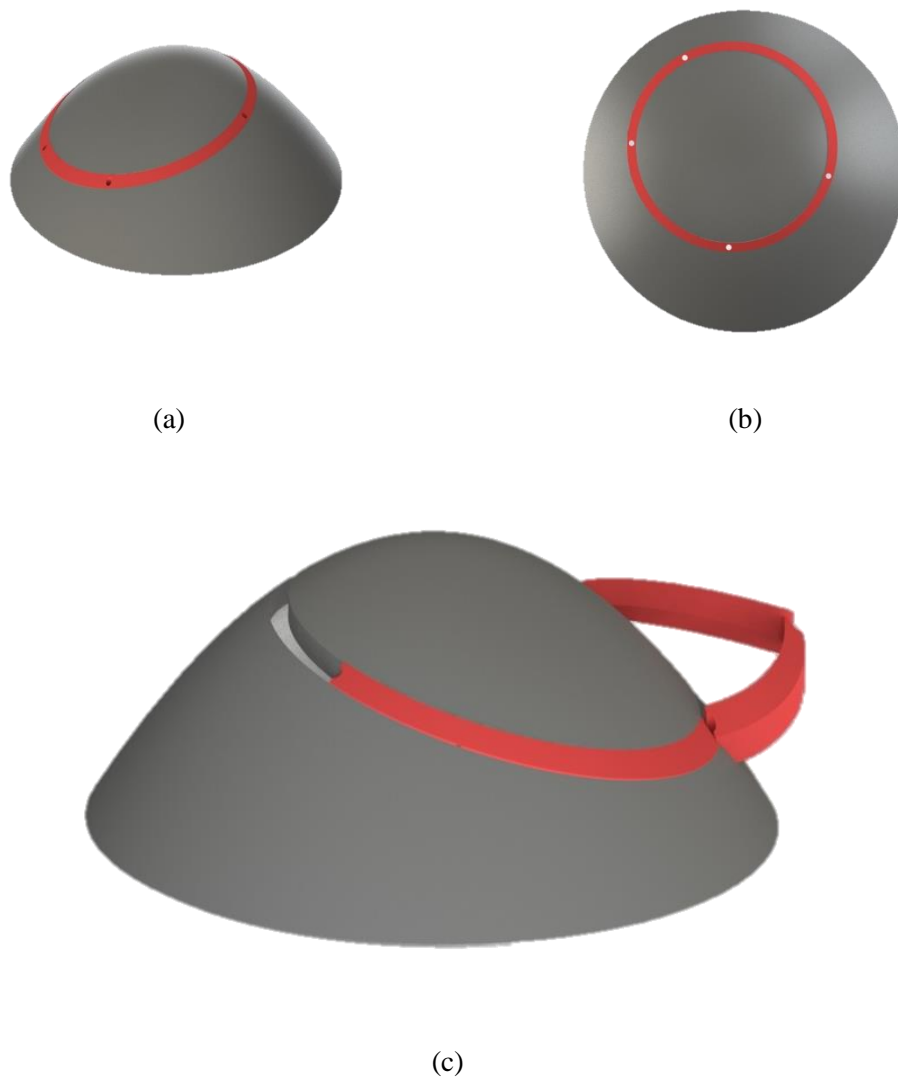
Shows a vertical cylindrical thick DM with shifted axis made on a paraboloid. (a) Isometric view when the mechanism is conformed, (b) Top view of the conformed system and (c) Isometric view of the mechanism in deployed state.
